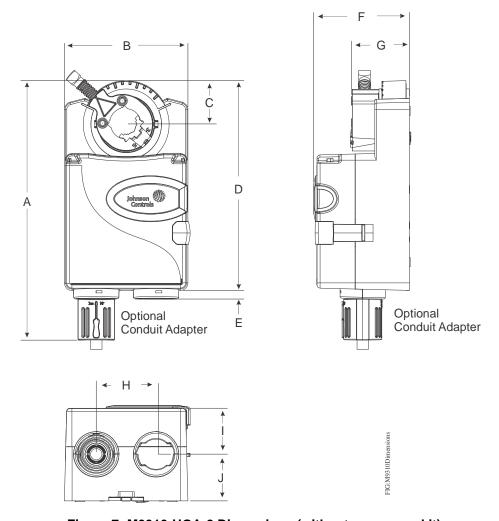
M9310-HGA-2 Dimensions (without accessory kit)
